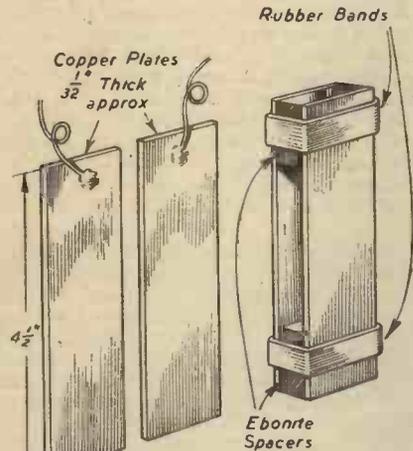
Dimensions of the plates and method of assembling the principal parts of the cell.
